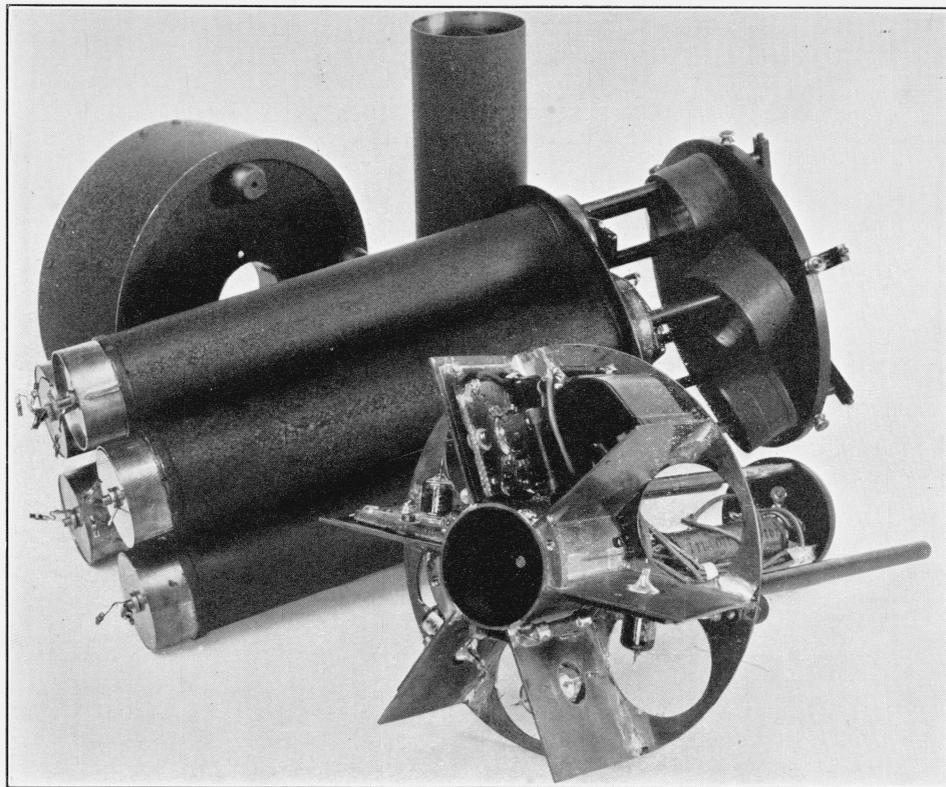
The concentric-line receiver showing method of assembly.
